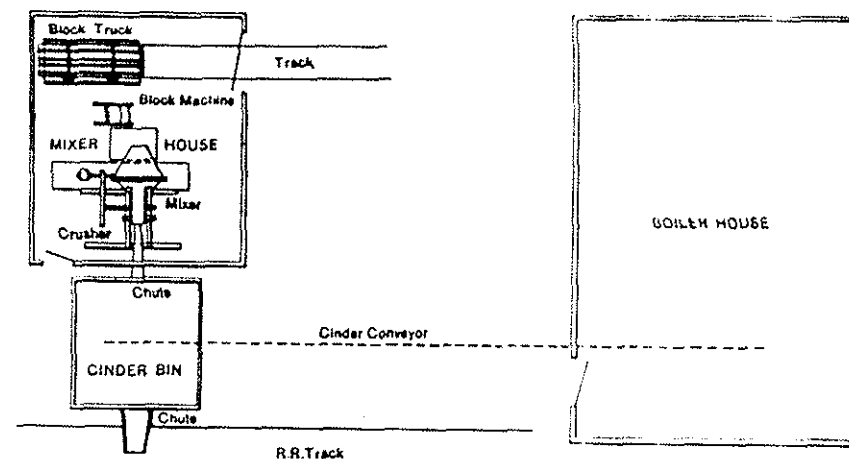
Arrangement of plant for making concrete blocks (After Ross.)
